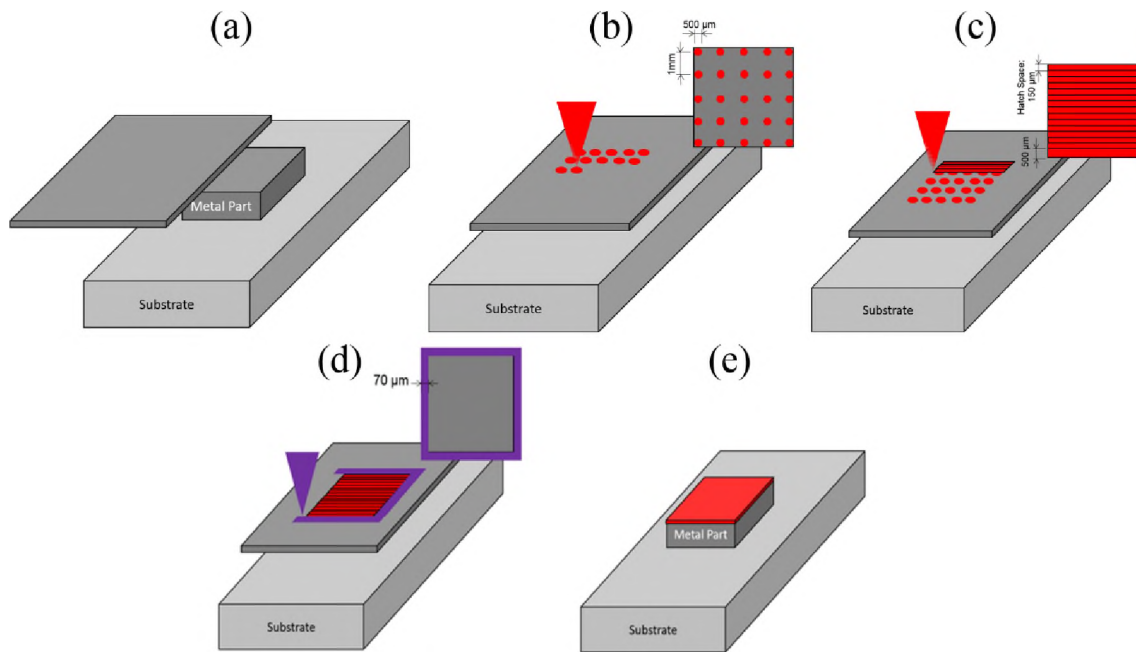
Schematic illustrations of the five steps in LFP for the processing of each layer: (a) foil feeding; (b) spot welding; (c) pattern welding; (d) contour cutting; (e) excess foil removing.
